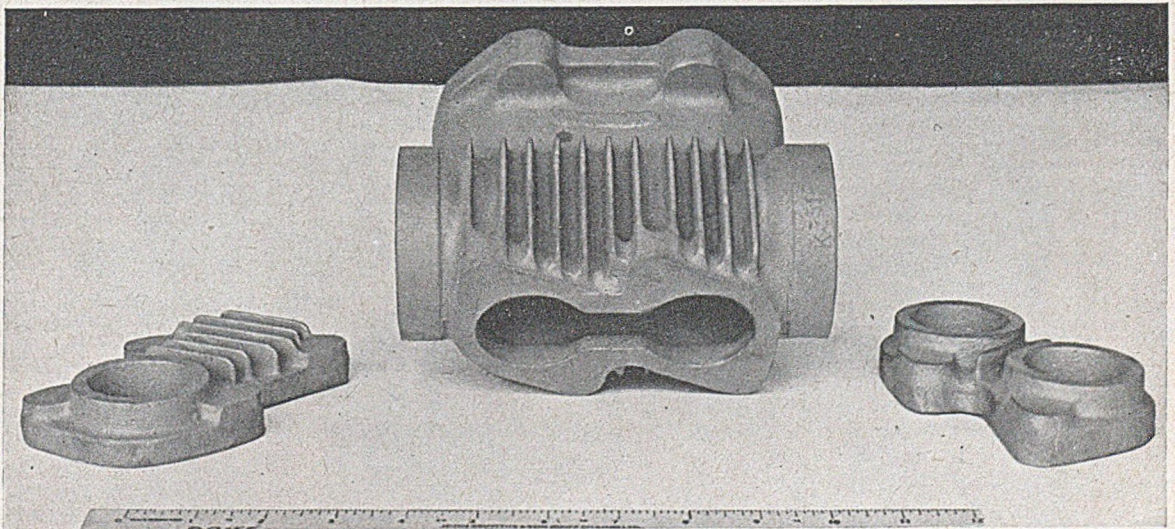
Group of Shell-moulded Austenite Steel Castings. Note the Good Surface Finish.
